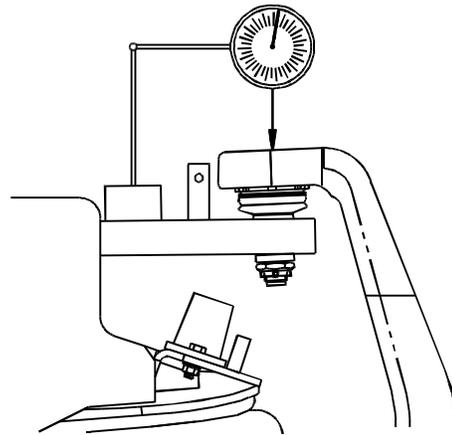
Upper Ball Joint Dial Indicator Mounting
